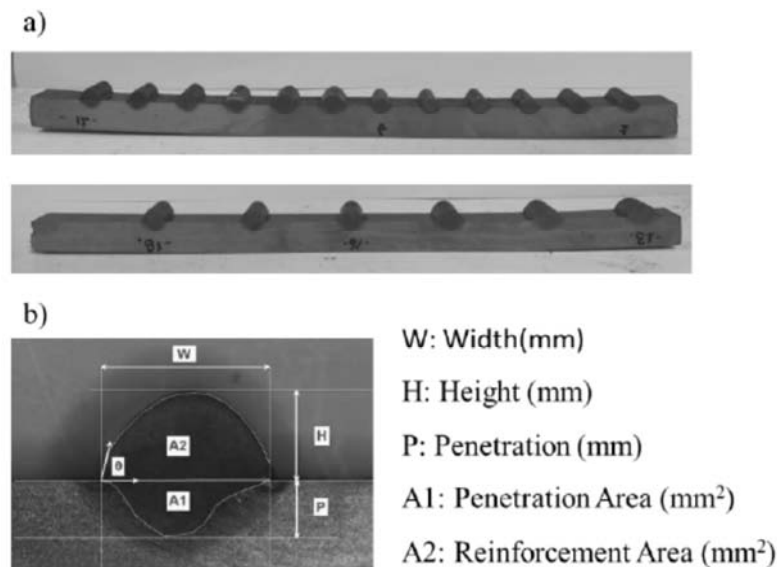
Sectioned and etched weld beads (a), macro photography of one weld bead (b)
